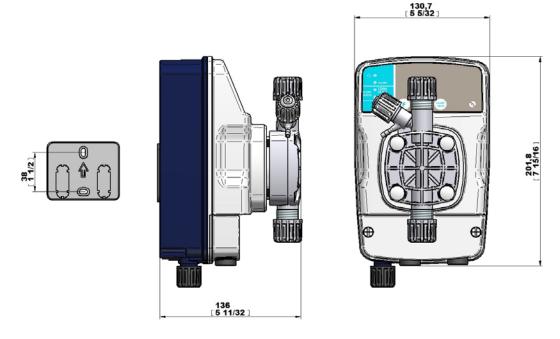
Dimensions in mm. Plate for wall mounting.
